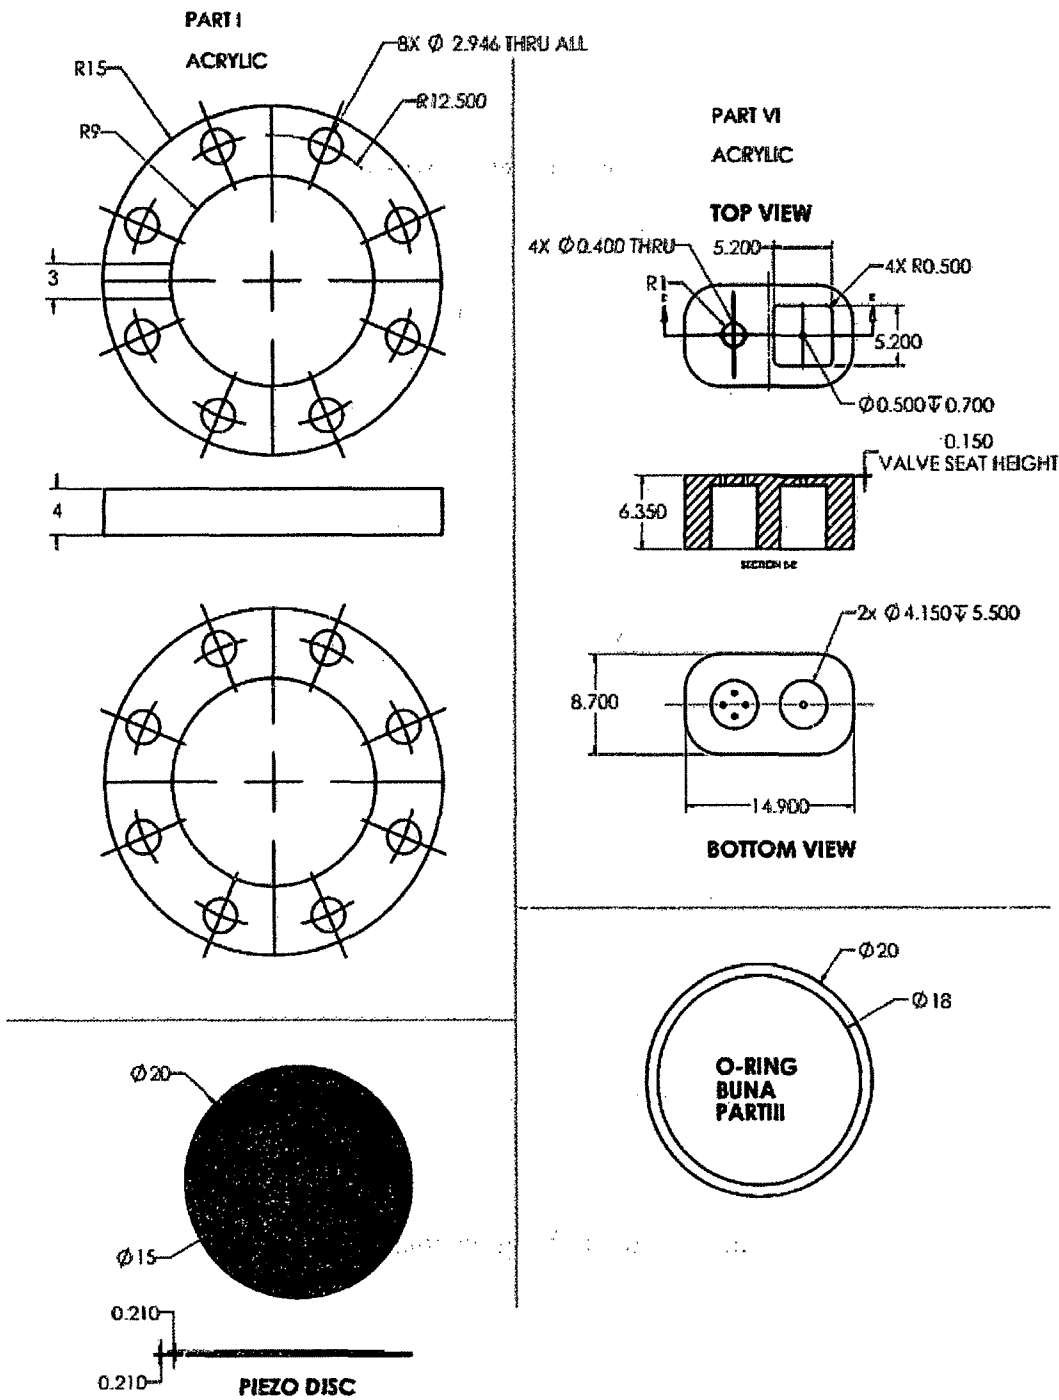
Dimensions of single-stage microcompressor for part I, part VI, piezo disc and O-ring.
